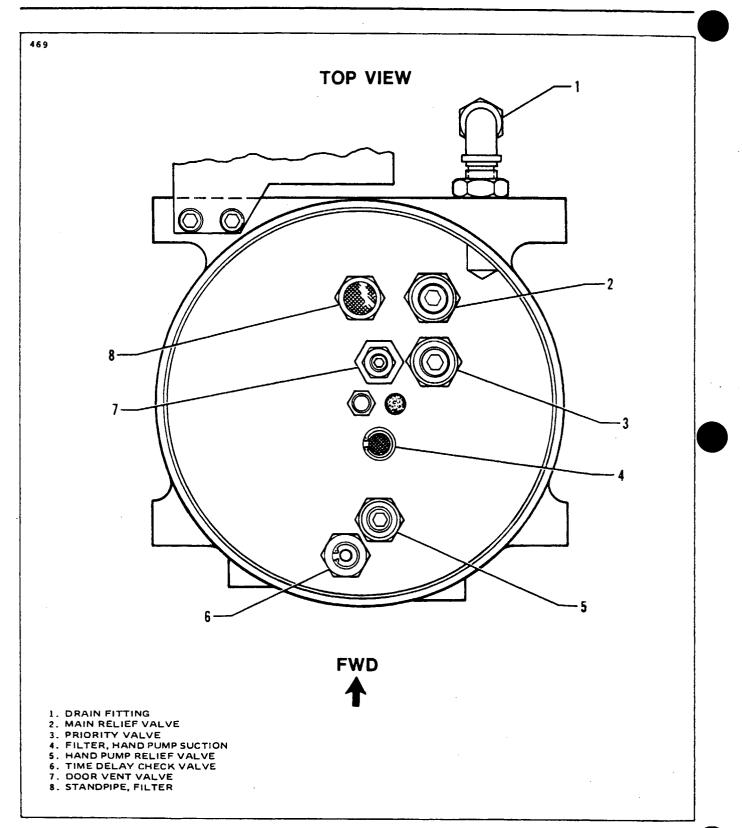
Location of Power Pack Components (Wiebel Tool)
